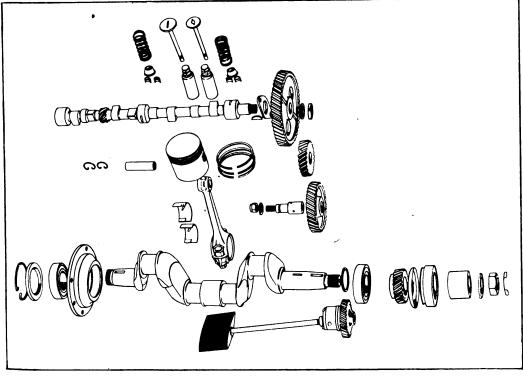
EXPLOSION VIEW OF CRANKSHAFT, CAMSHAFT. GEAR AND OIL PUMP ASSEMBLIES
